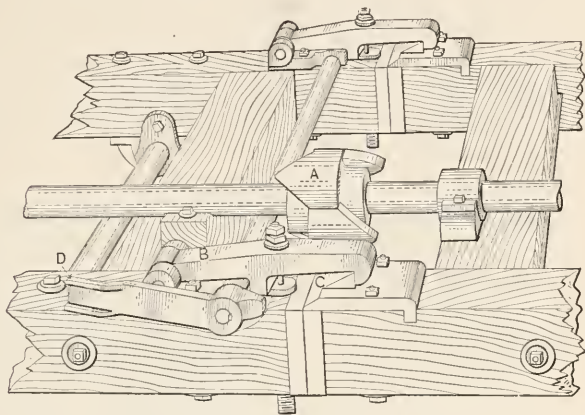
An Extension or Trailer for a Sawmill Carriage. A. Set-shaft Coupling Wings which line up the Knees on the Carriage and Trailer. B. A Hook which fits over the Catch C and holds the Trailer and Carriage together. D. A Foot Pedal for releasing B.
